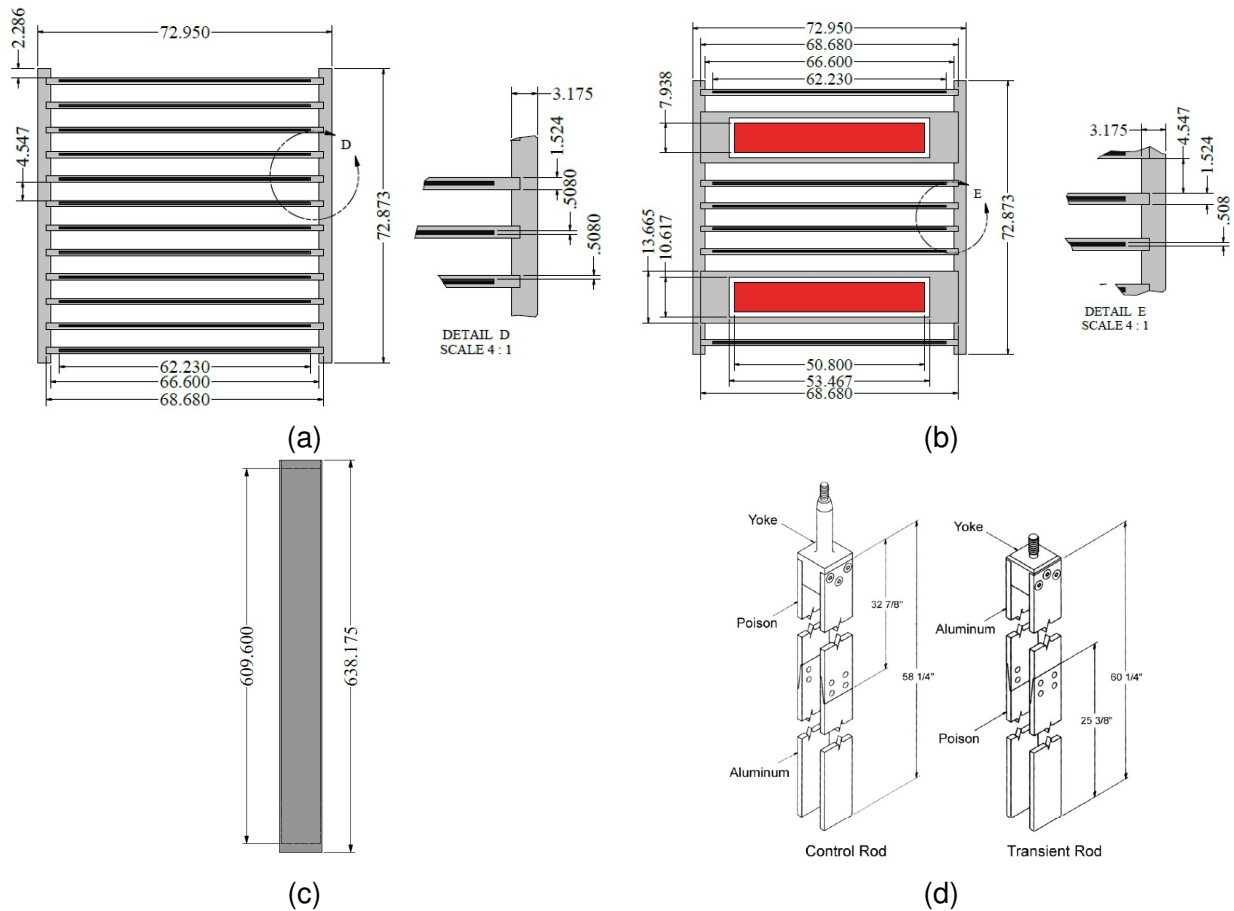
SPERT-IV dimensions [20]: (a) standard fuel assembly in mm; (b) control fuel assembly in mm; (c) plate-fuel in mm; (d) control and transient rod in inch
